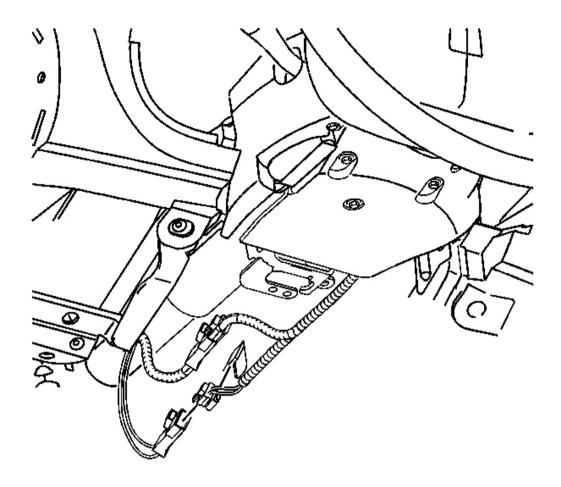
CPA & Steering Wheel Module Coil Connector Courtesy of GENERAL MOTORS CORP.
